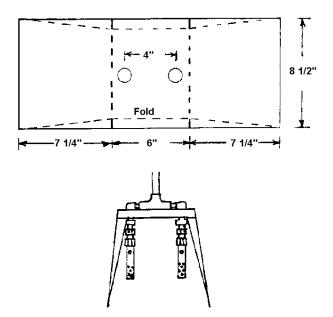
Propane weed burner with a flame shield. The flame shield is constructed from an $8.1/2 \times 20.1/2 \times 0.047$ inch sheet metal.
